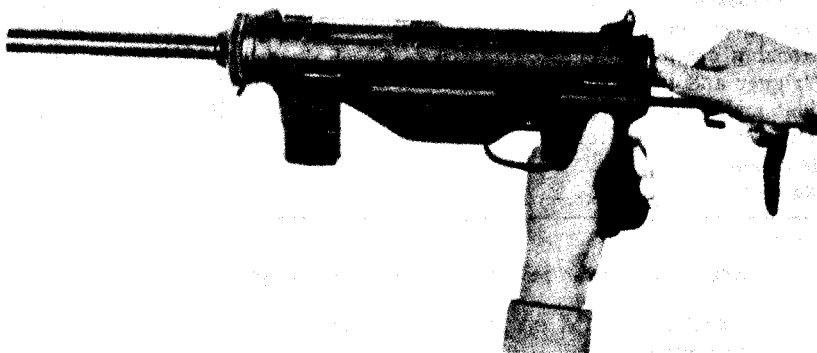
Press in on stock catch on the left side of the pistol grip, and remove the stock by pulling it directly to the rear.
